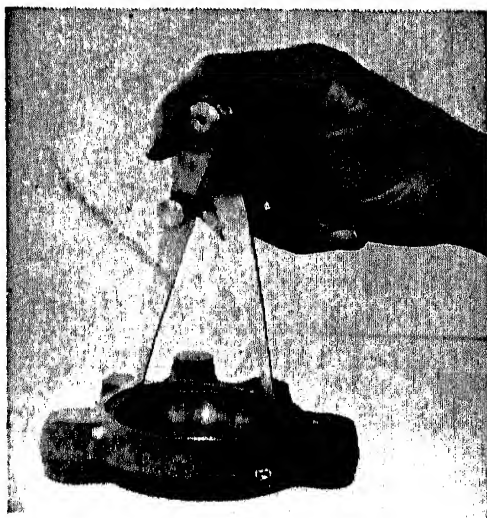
A transfer caliper applied to an inside recess. (Courtesy Brown and Sharpe Mfg. Co.)
